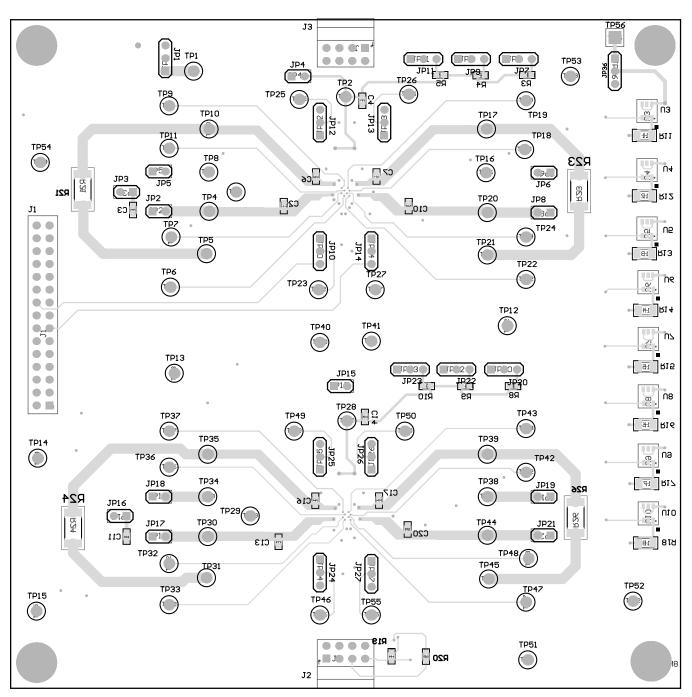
I²C Load Switch EVM Board Bottom Side (Minus GND Pour)
